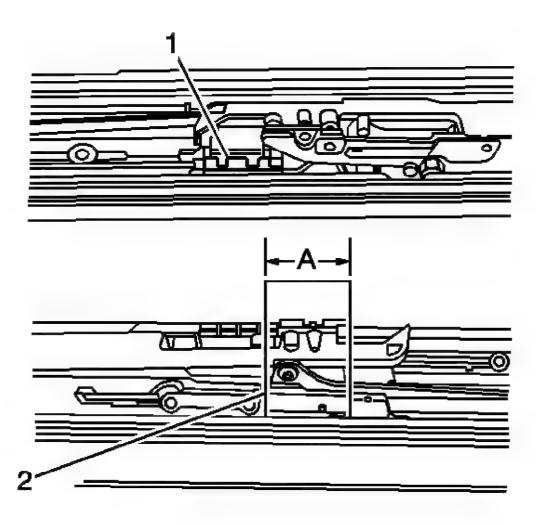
View of Gage and Move Driver Slide Courtesy of GENERAL MOTORS CORP.
